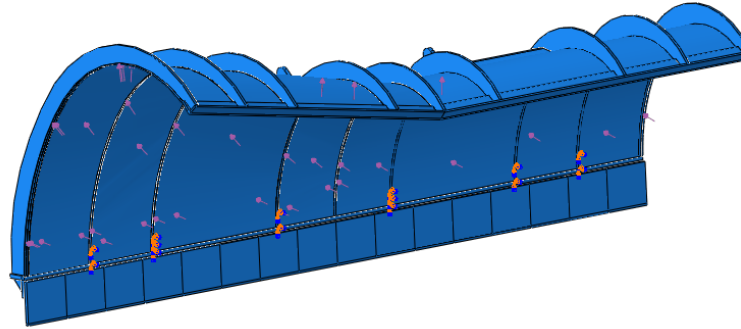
Front plow blade subjected to uniform moldboard pressure.
